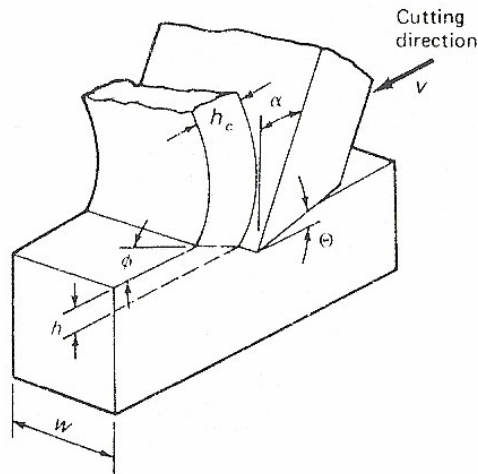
The view of zero or positive rake angle in orthogonal cutting [19]
